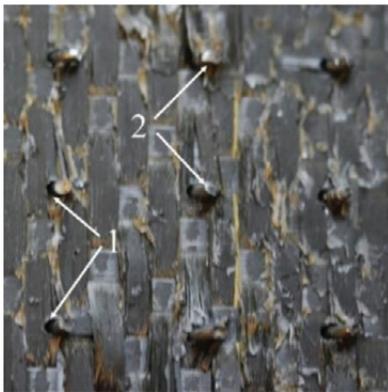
Failure character: a – the hybrid joint with 36 pins; b – the mechanically fastened counterpart with 9 pinsFig. 8. Bearing (1) and shear (2) failure of the z-pins within the hybrid joint
